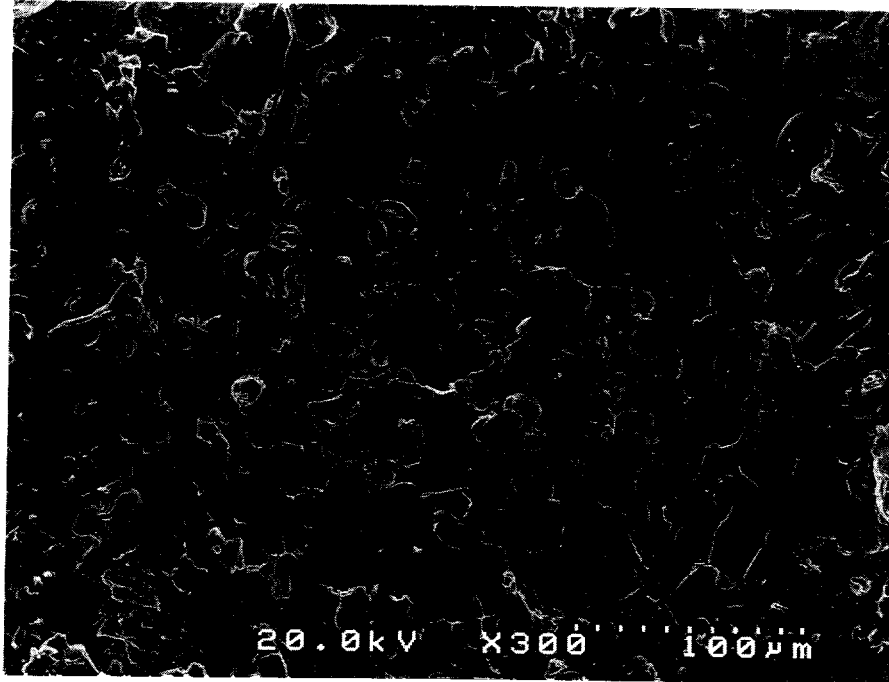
Fracture surface of the joint brazed with BAg-21 for 3600s.
